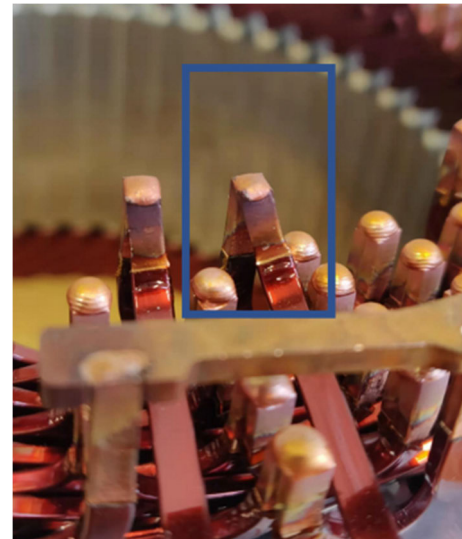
Welding mismatch defects within stator 9.
